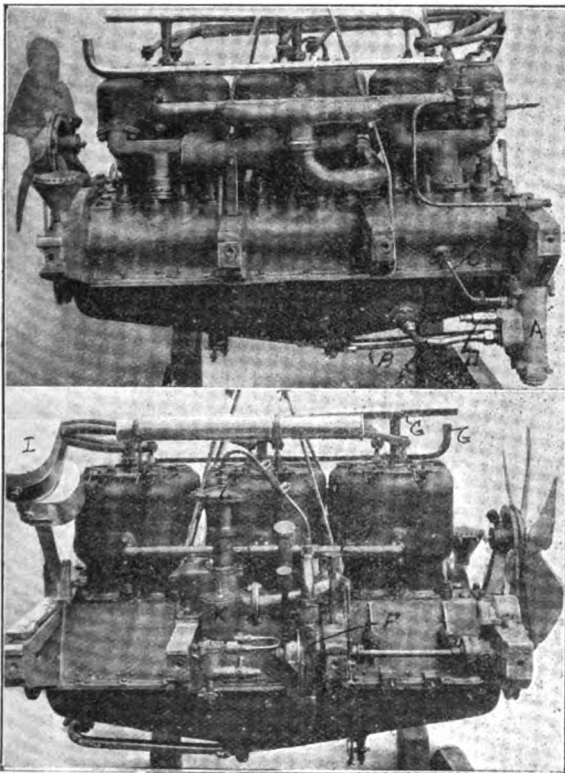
Two Views of Napier 45-h.p. Six-cylinder Engine.
